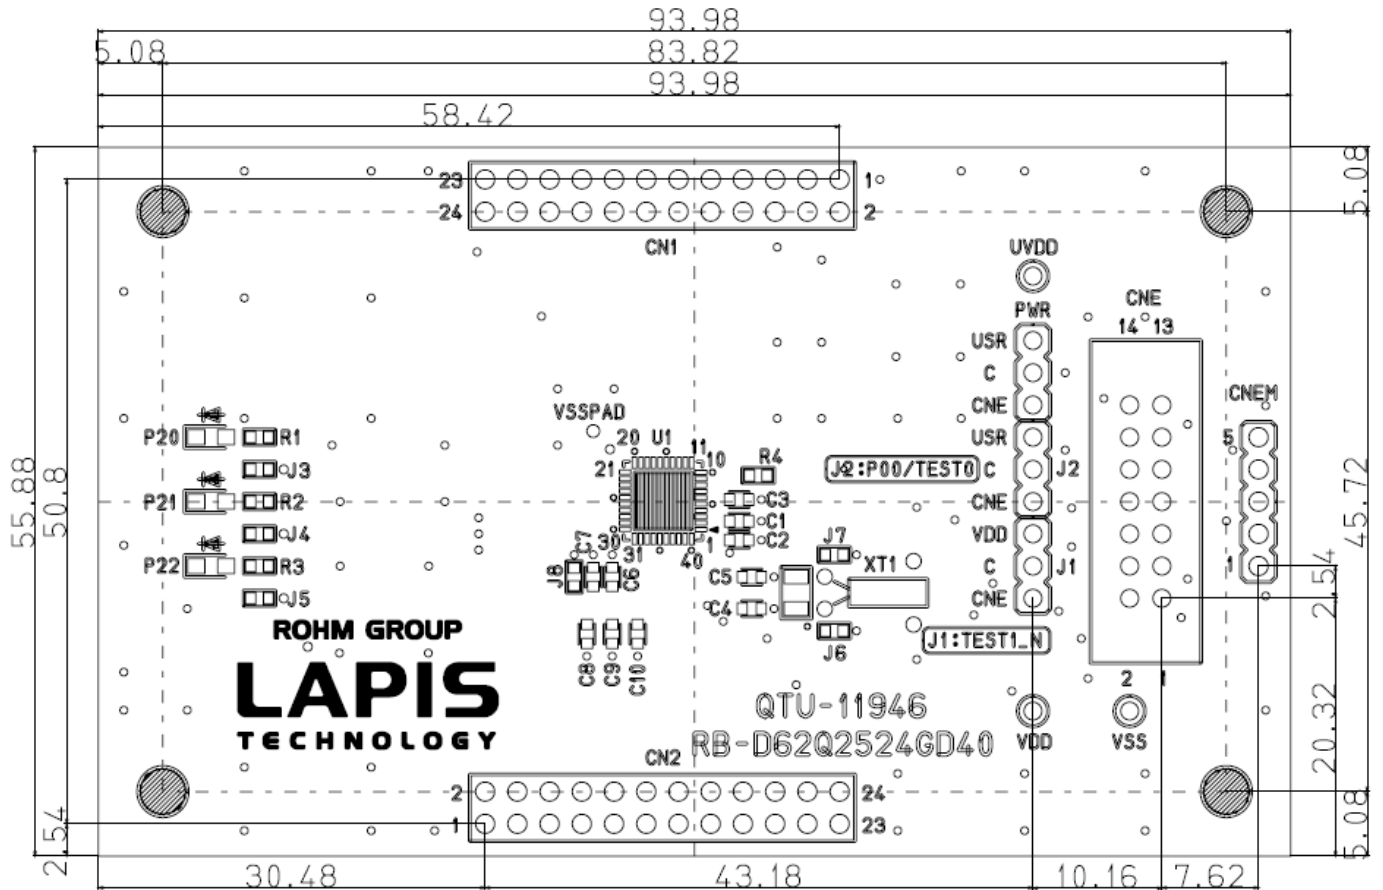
PCB dimensional outline diagram and layout of components (Top view)
